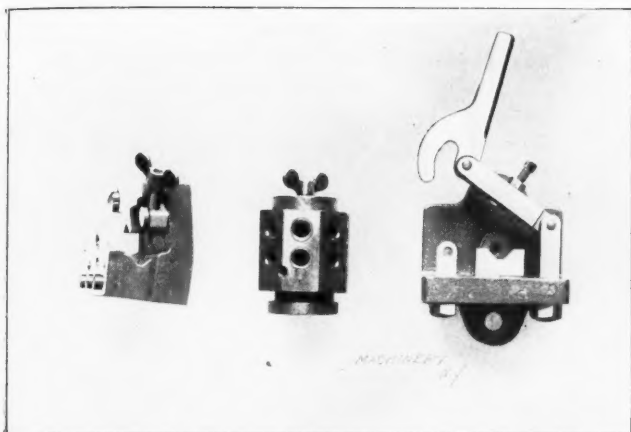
Three Types of Drill Jigs, each of which is equipped with Different Locking Device
